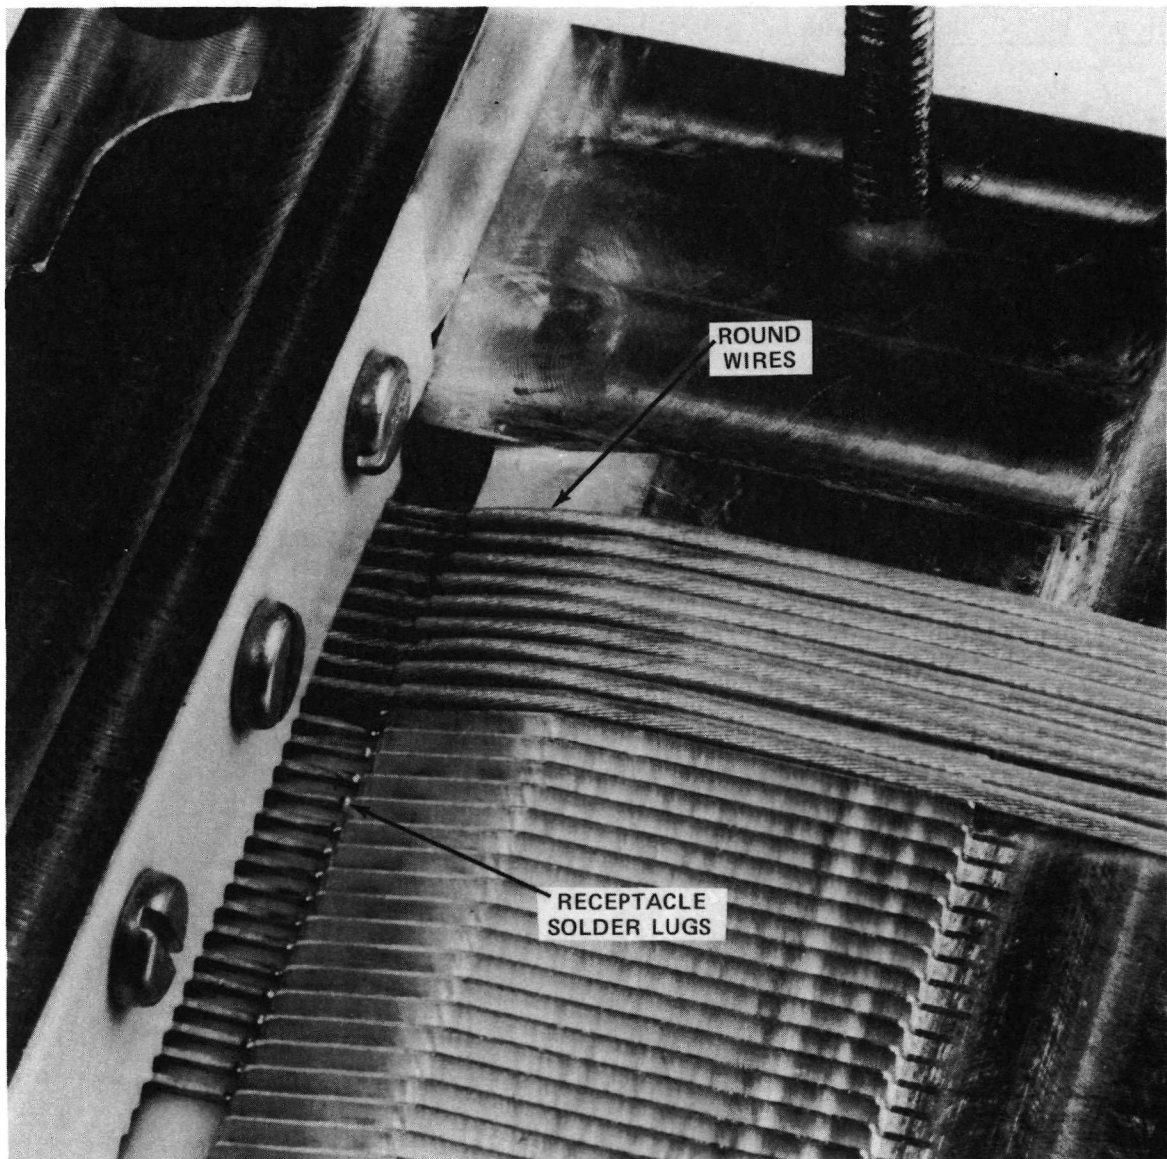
Closeup view of soldering fixture, with one clamping plate removed (only a few round wires have been inserted).
